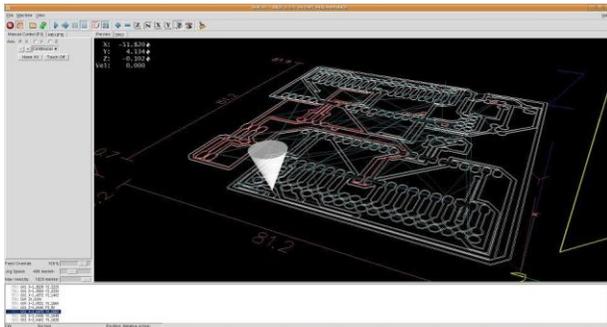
A screenshot of the machine-tool path which fabricated the electronic board for NOVA’s propulsion system.
